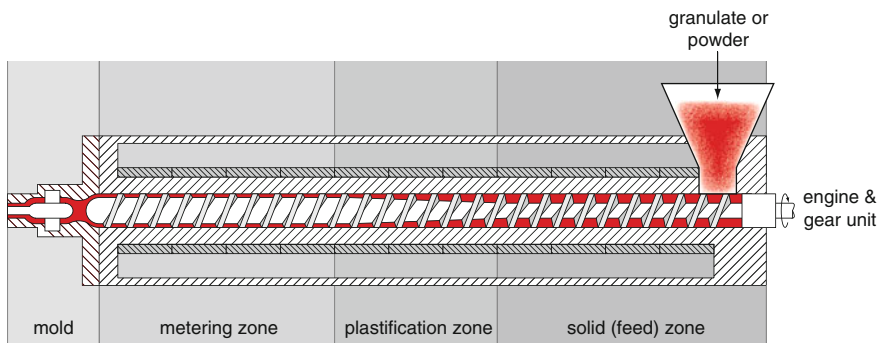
Sectional drawing of single-screw extruder with functional zones
